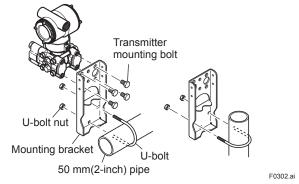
Transmitter Mounting (Horizontal Impulse Piping Type)
